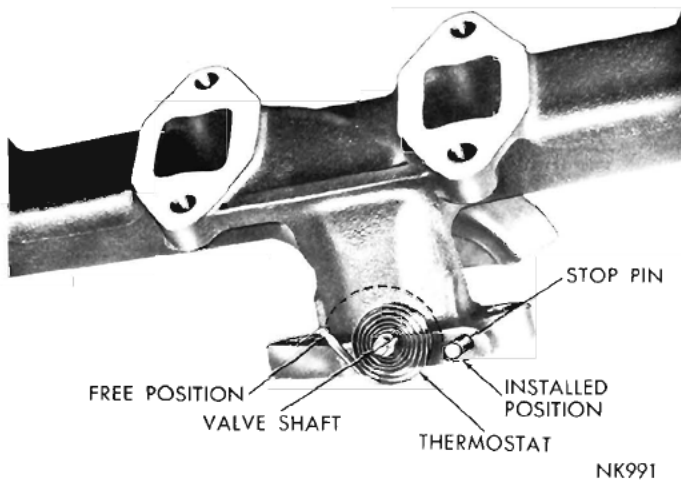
Installing Thermostat (318 Cu. In. Engine)
